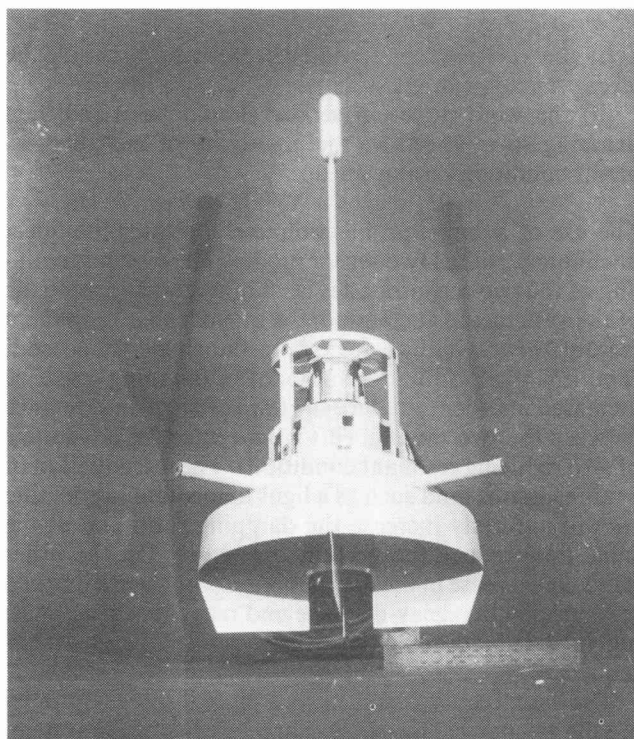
Shaft assembly mounted on retaining ring. Ring is fixed to inner drum surface by three cantilevered bolts, 120° – 120° – 120° (Patent Pending).
